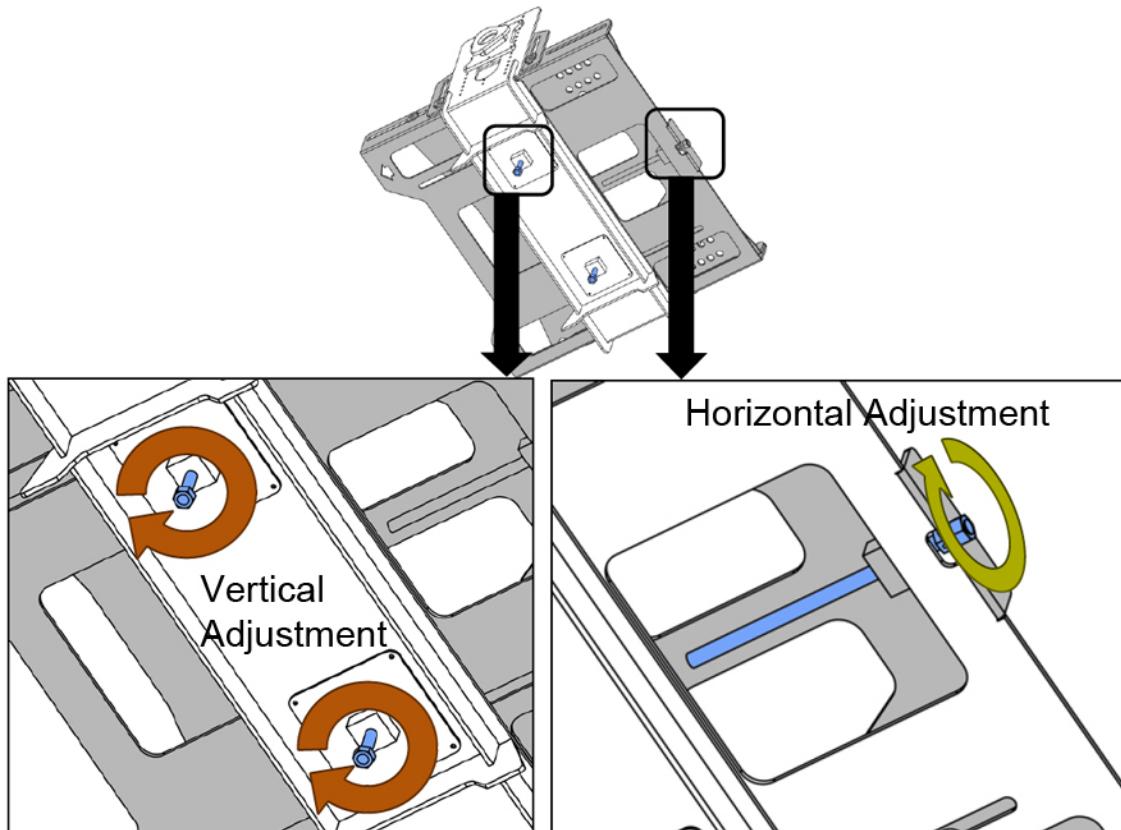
Bracket Vertical and Horizontal Adjustment Screws
